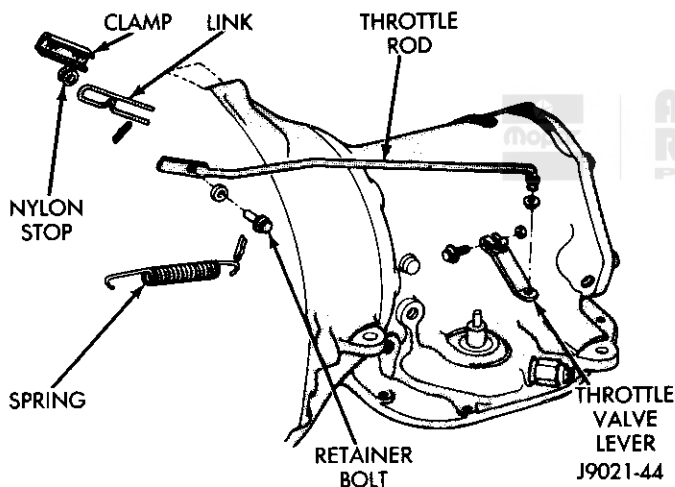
Throttle Valve Linkage – 6 Cylinder Engine
